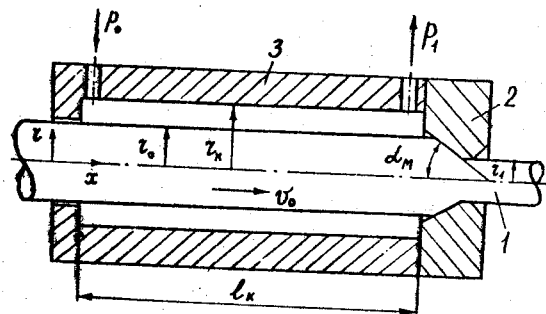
The scheme of hydrodynamically-aided wire drawing: 1 - the billet; 2 - the die; 3 - the high pressure chamber.
